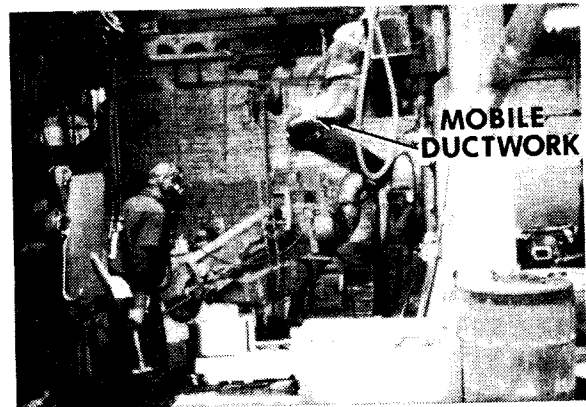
Mobile ductwork system exhausting swing grinder hood.
